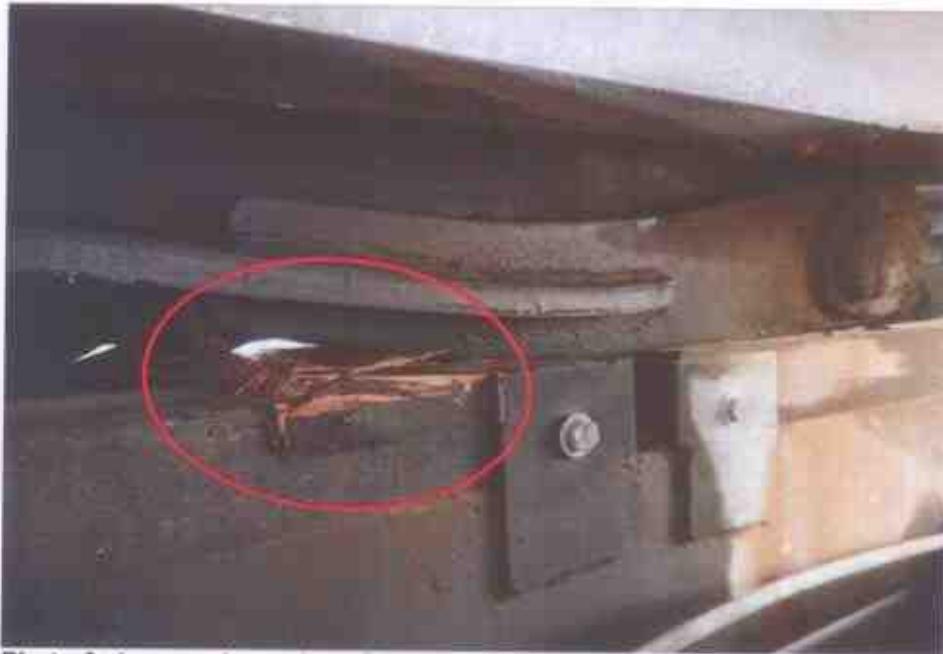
shows a closer view of the hoisting frame. The components of the frame assembly were observed to have been tilted, bend out of place and contacted and causing damage onto the chassis (arrowed) of the Insured Vehicle.
